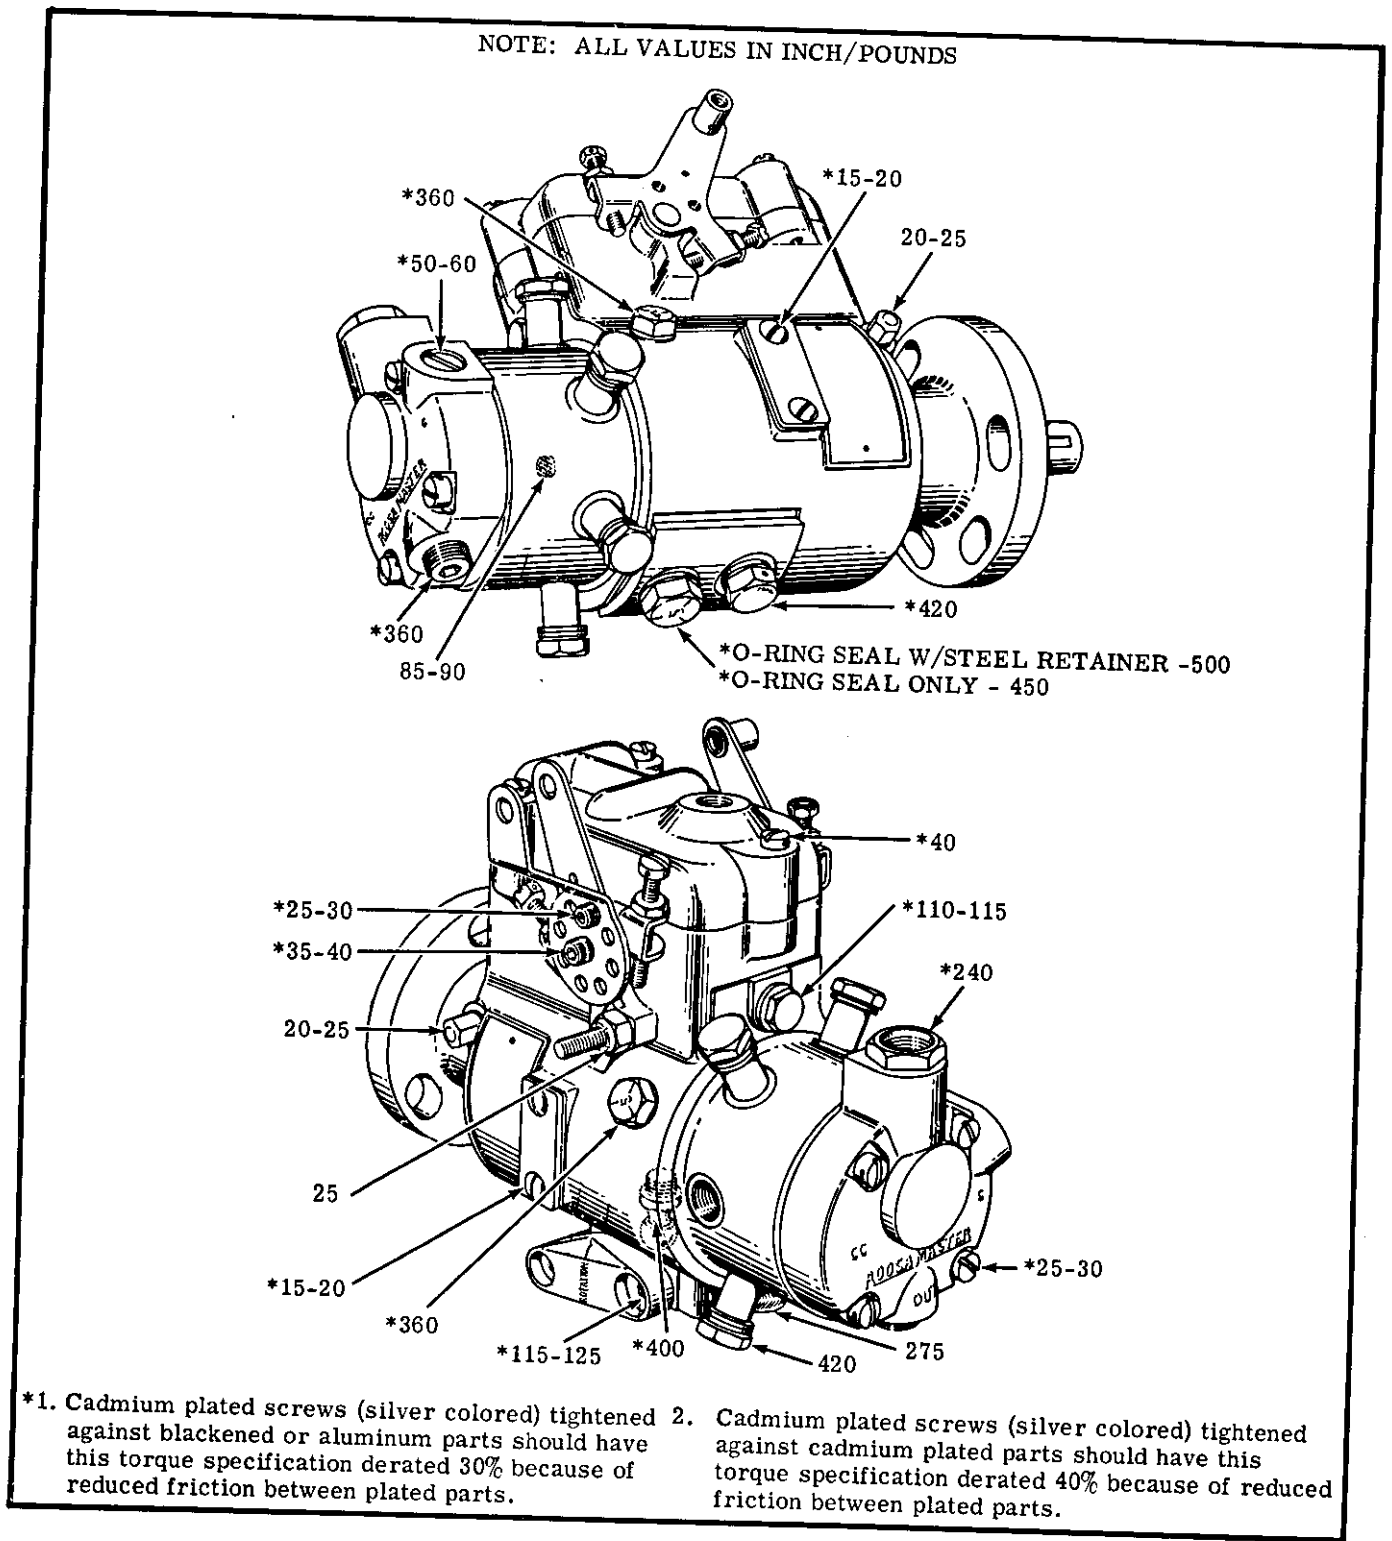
Fuel Injection Pump Fasteners, Torque Settings
